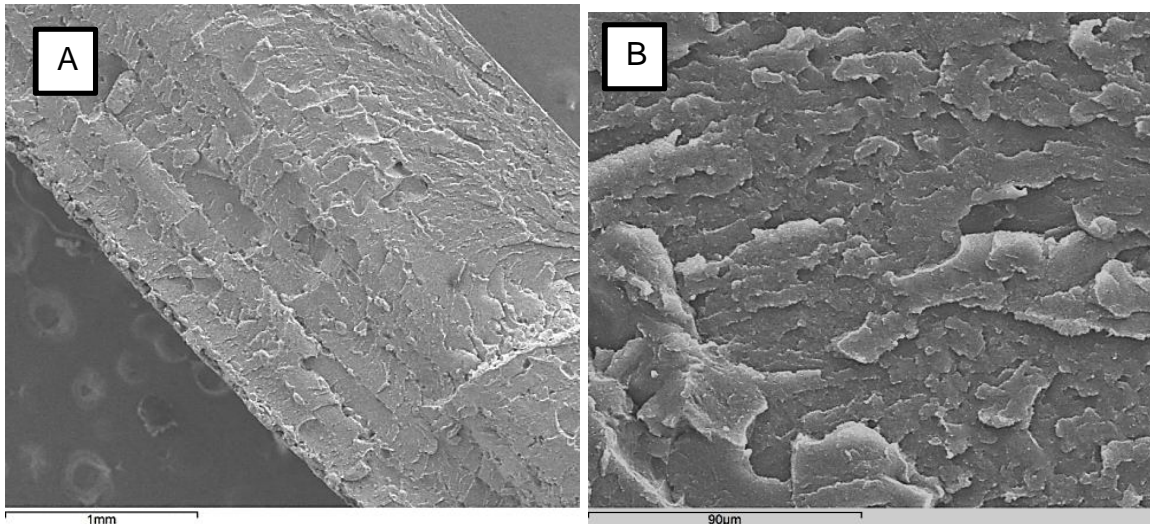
Fracture surface of PEK HP3 ten layer specimen (benchmark), PS = 12 s, at increasing magnification
